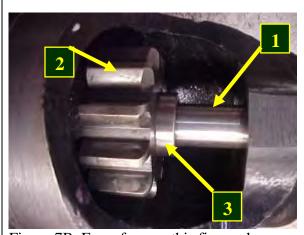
B. For reference this figure shows a starter with normal wear: The shaft will not be discolored (Ref. 1), no wiping or polishing of the non-pressure side of the pinion teeth (Ref. 2), and the thrust bearing will not be damaged (Ref. 3).
